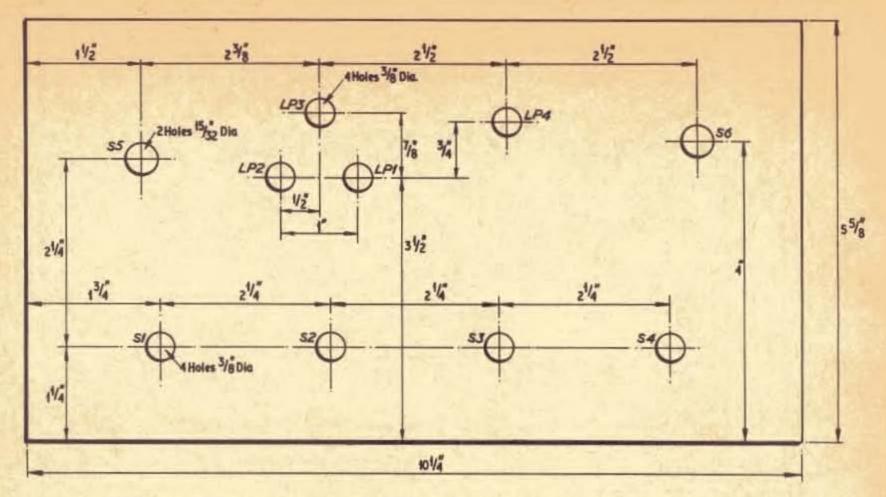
Suggested layout and drilling details of the panel looking at the top face
